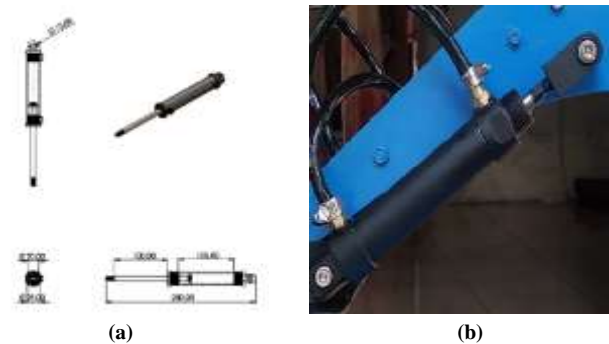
(a) Hydraulic Piston Design; (b) Piston Arm Backhoe.
